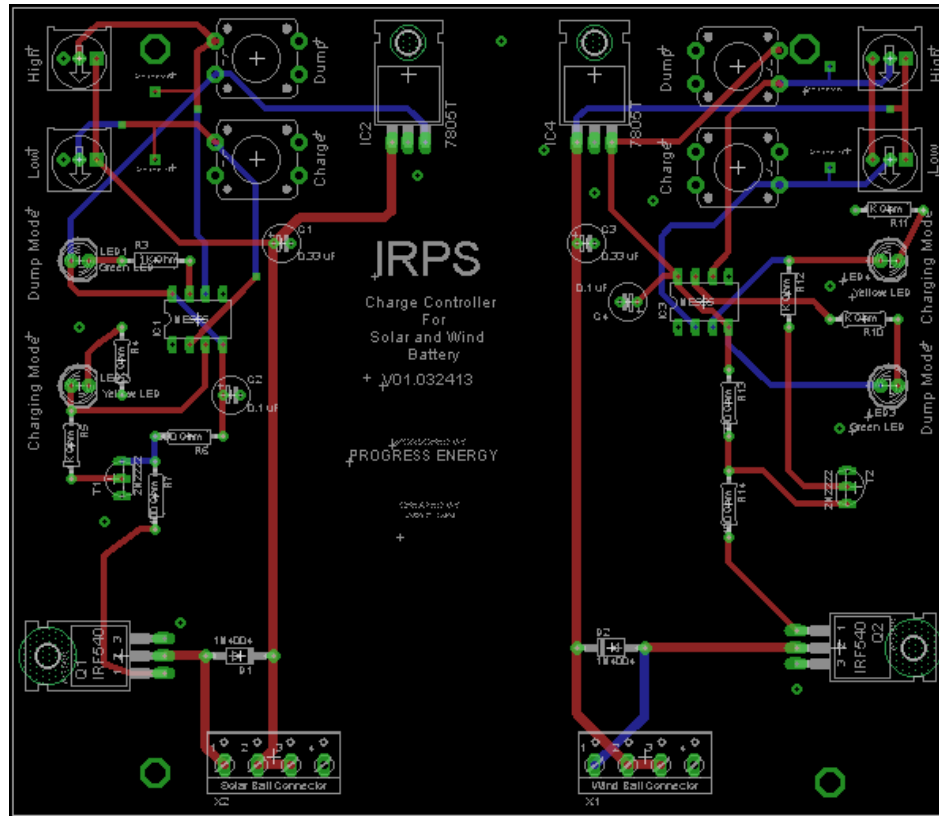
PCB Layout of Battery Charge Controller and Diversion Load Circuit
